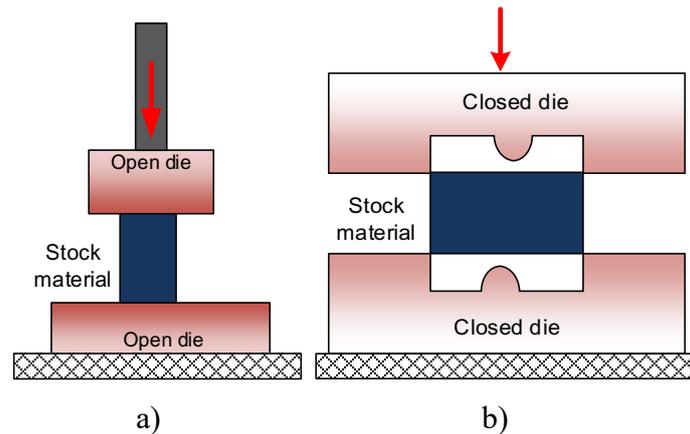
Schematic showing types of dies for forging a) open die and b) closed die
